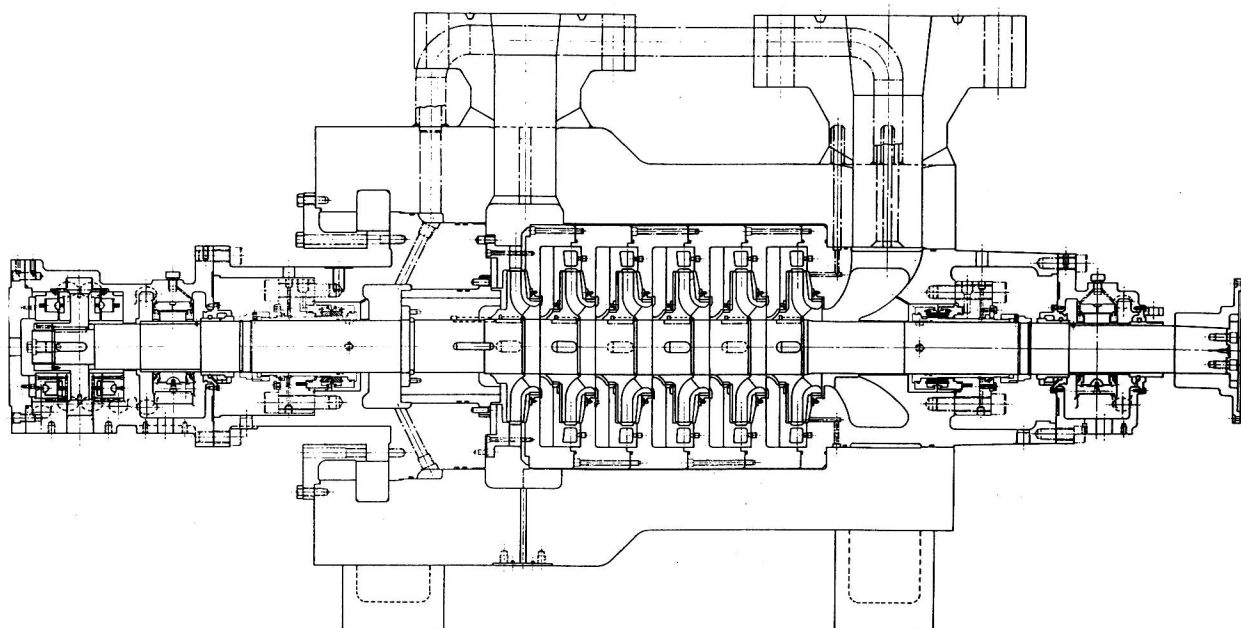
Sectional arrangement of 8 1/10 6 stage barrel casing pump constructed in duplex stainless steel (Ekofisk Field)
